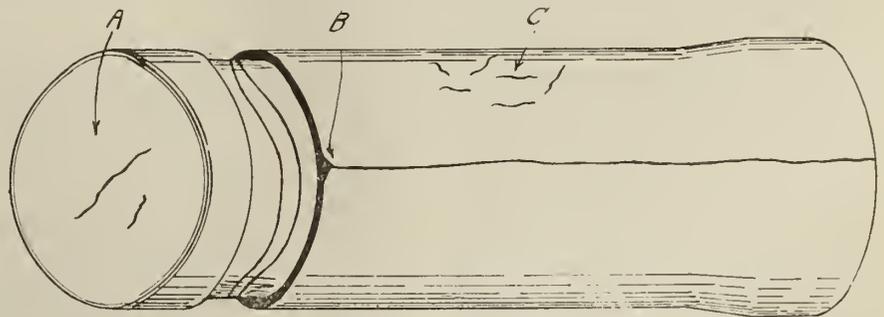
DEFECTS IN SHELL FORGINGS.
